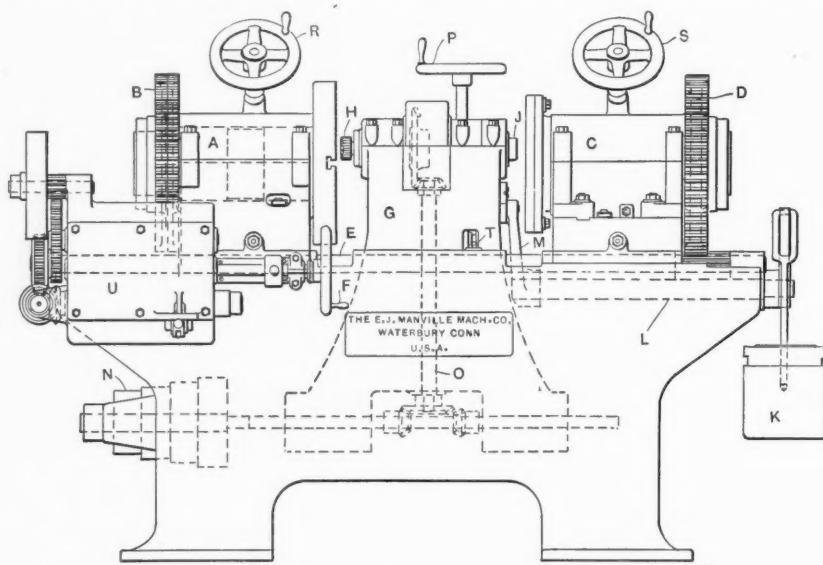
Front View, showing Driving Connections for Spindle and Rotary Feed Motion.
